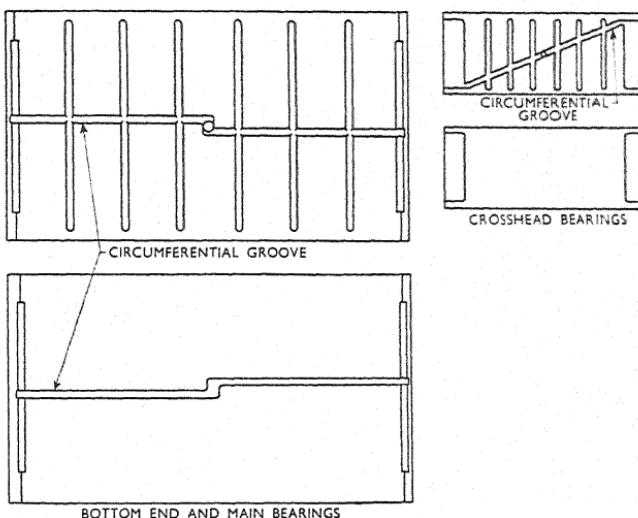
Detail of Oil Grooves in Bearings (Doxford Engines)
